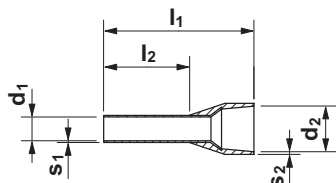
Dimensions (tolerances according to DIN 46228-4)
